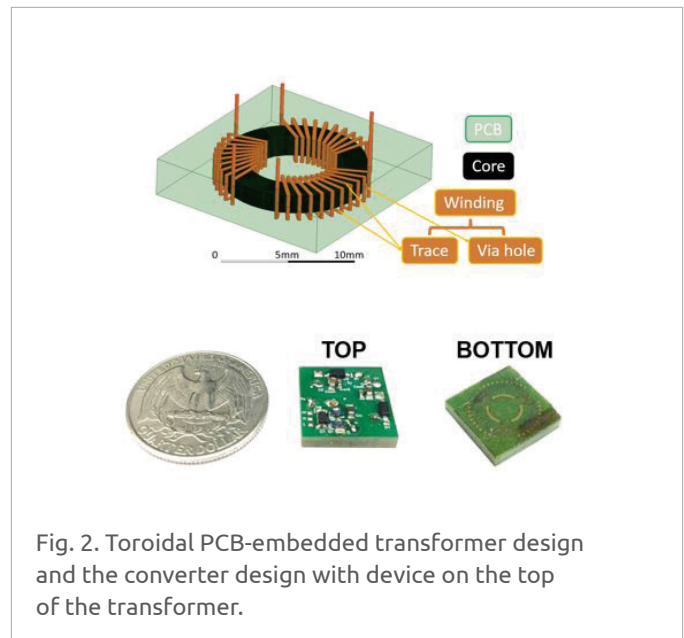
Toroidal PCB-embedded transformer design and the converter design with device on the top of the transformer.
